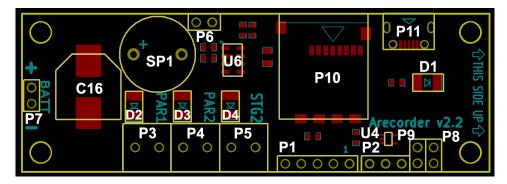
Location of important components on top side of Arecorder's PCB board.
